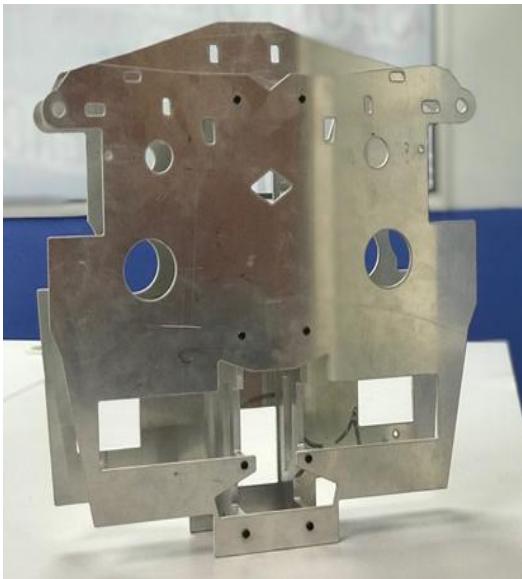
Fabrication process of the upper torso using water jet cutter and CNC machine
